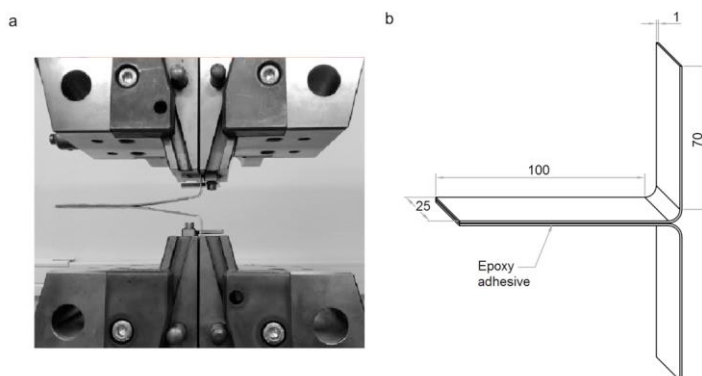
A joint specimen mounted on the testing machine (a) and dimensions (b) of sample used in static T-peel testing.
